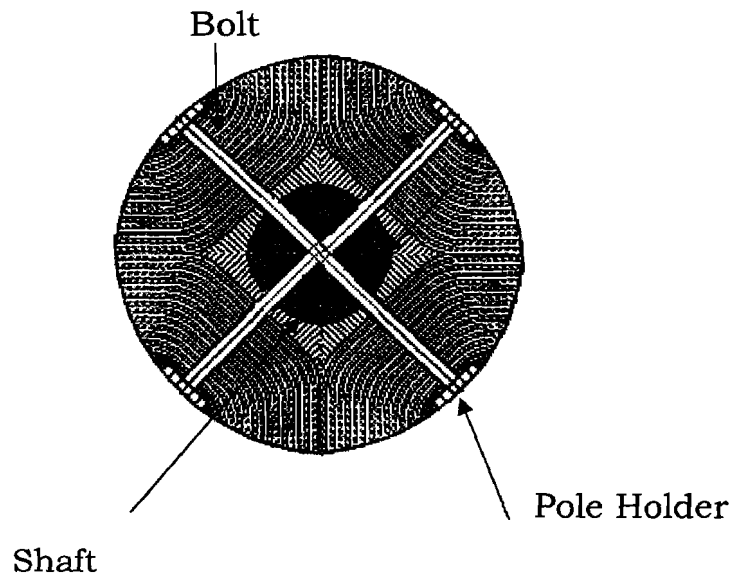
Sectional view of axially laminated anisotropic rotor
